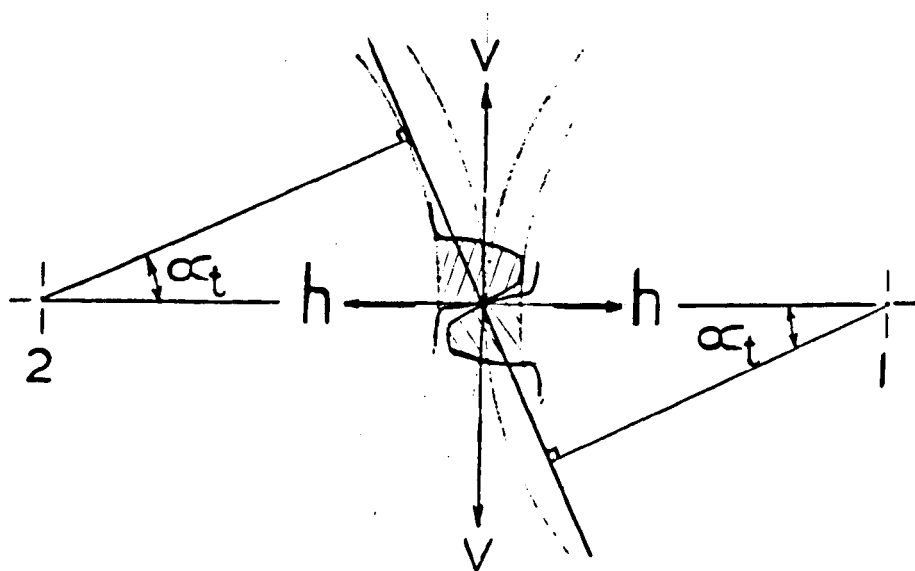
Transverse Section Through Gears Showing Vertical & Horizontal Directions & Loaded Side of Tooth
